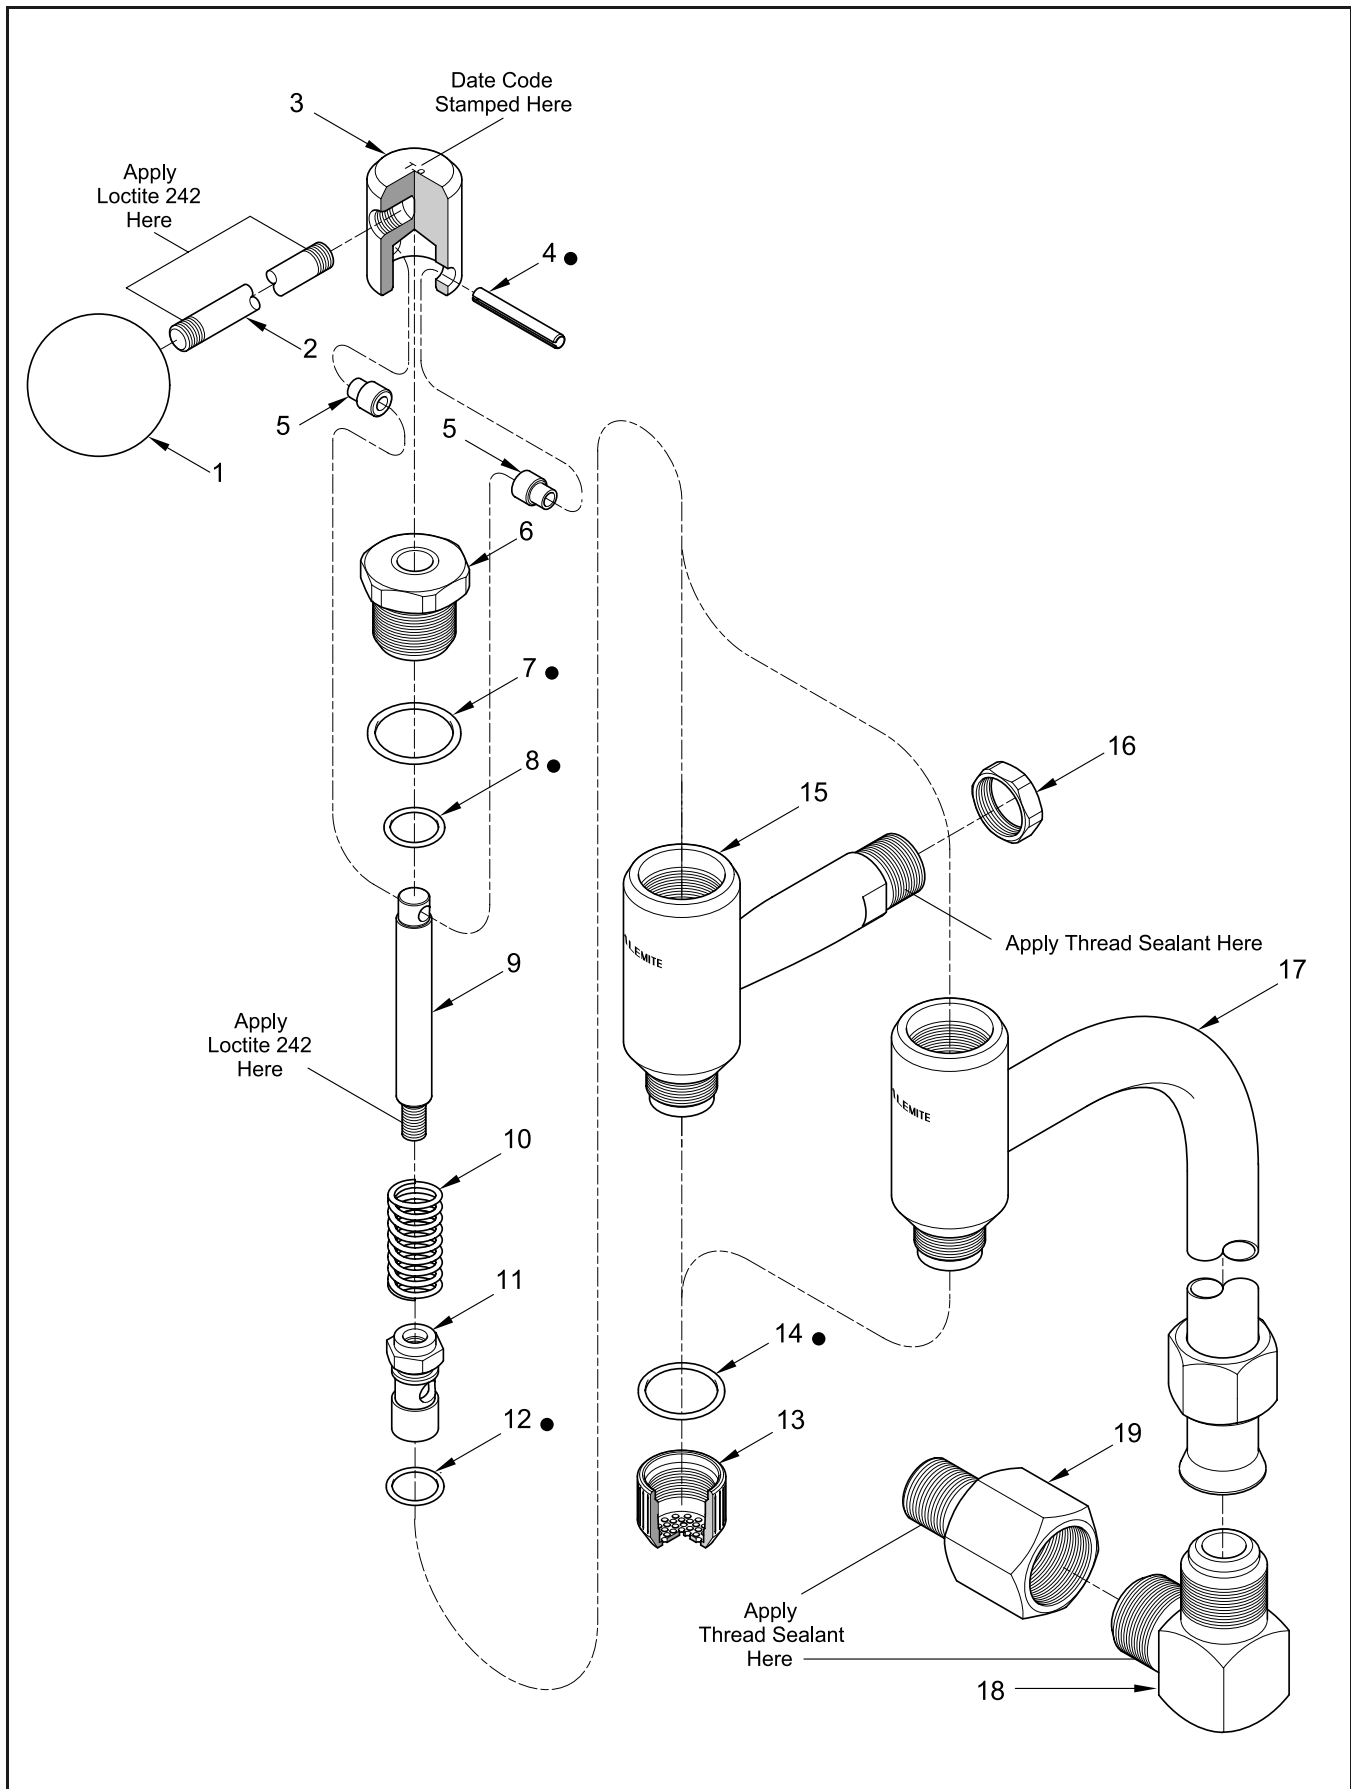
Dispensing Valve Model 7480-1 and 7481-1 - Exploded View
